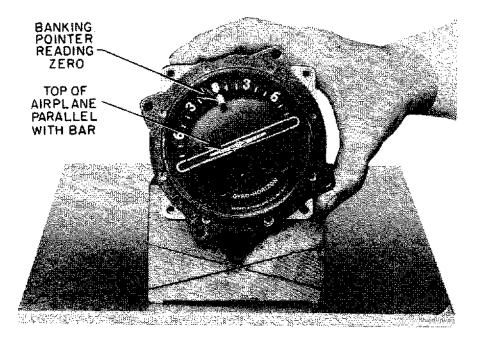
CHECKING THE ALIGNMENT OF THE POINTER BAR AND THE BAMK-ING INDICATOR BEFORE REFLACING THE FRONT COVER
